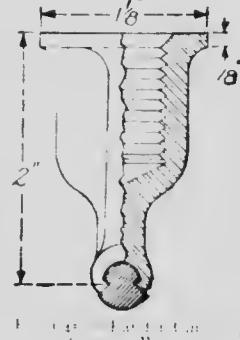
Ear for Clamping a Round Trolley Wire.
